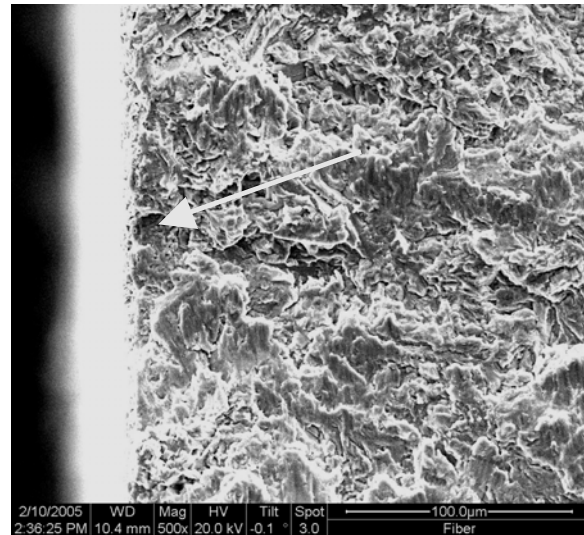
Specimen Ti-06, close-up view of crack initiation site
